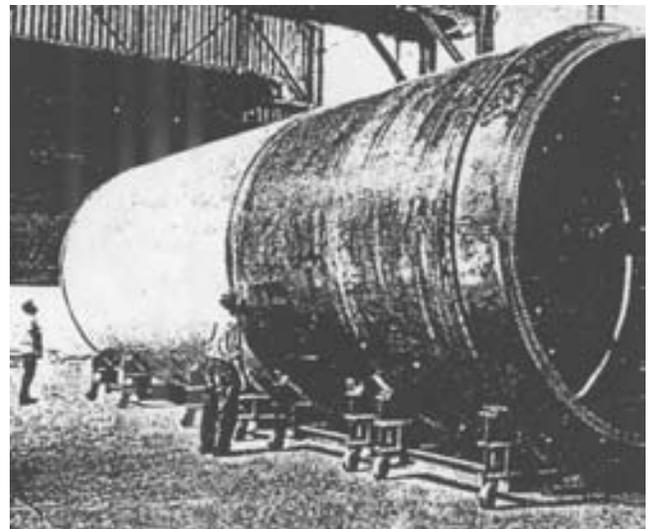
Two sections of 156 in. diam rocket motor case after fabrication by rolling and welding 18% nickel maraging steel
